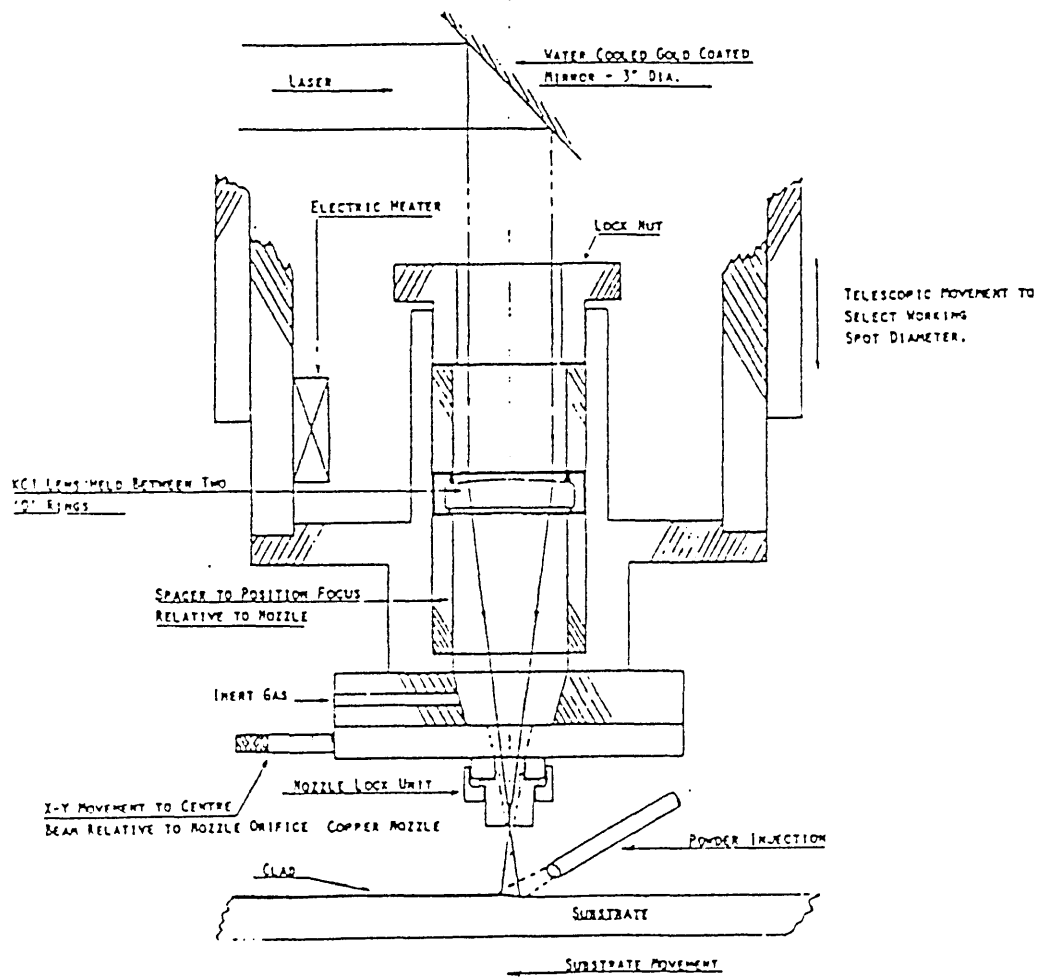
Schematic diagram of laser head (Ref. 38).
